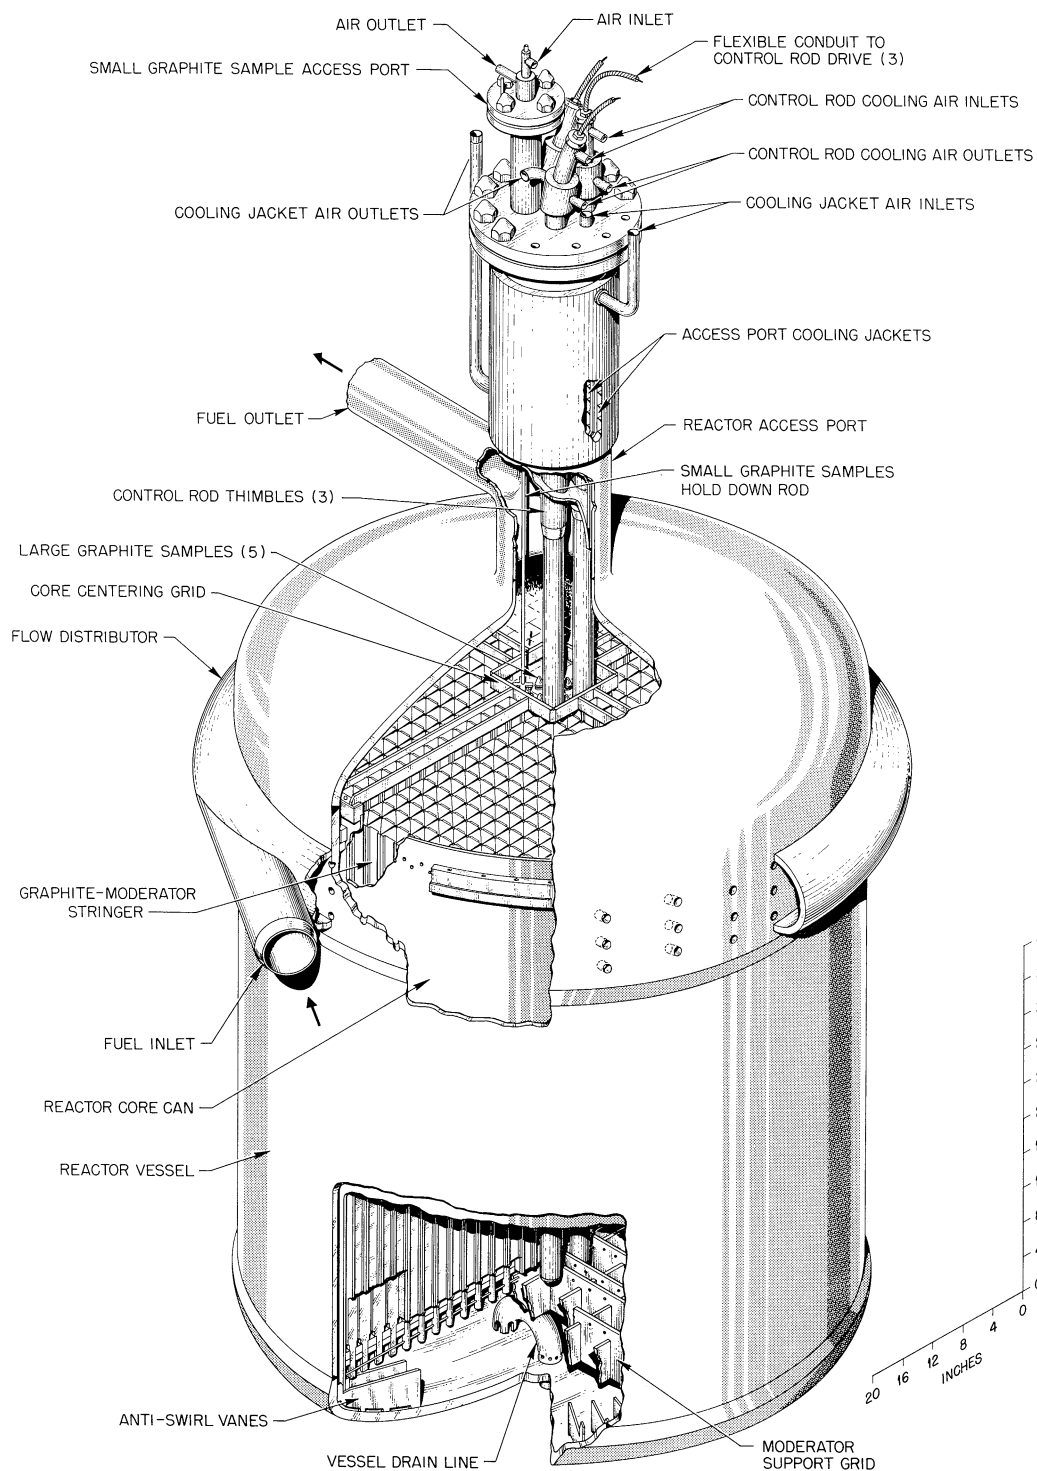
Cutaway Drawing of MSRE Core and Core Vessel.
